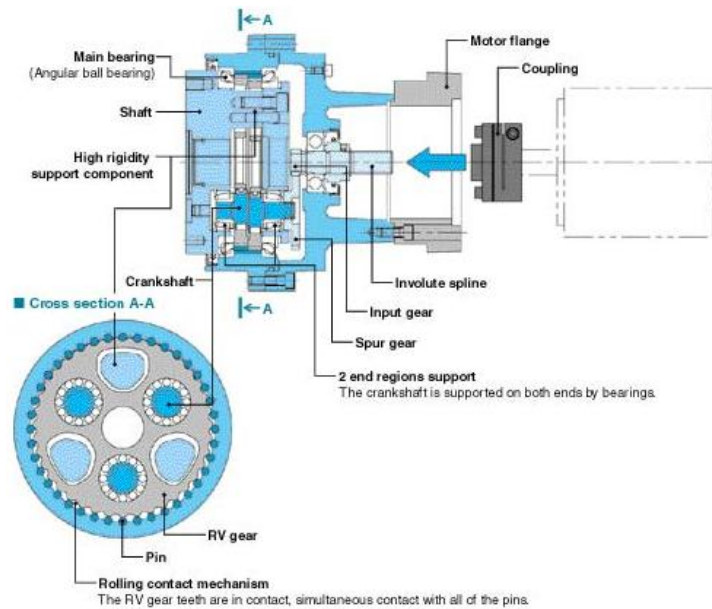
Nabtesco Cross Section Drawing of Inline Gear Head Used for the TTT [19].
